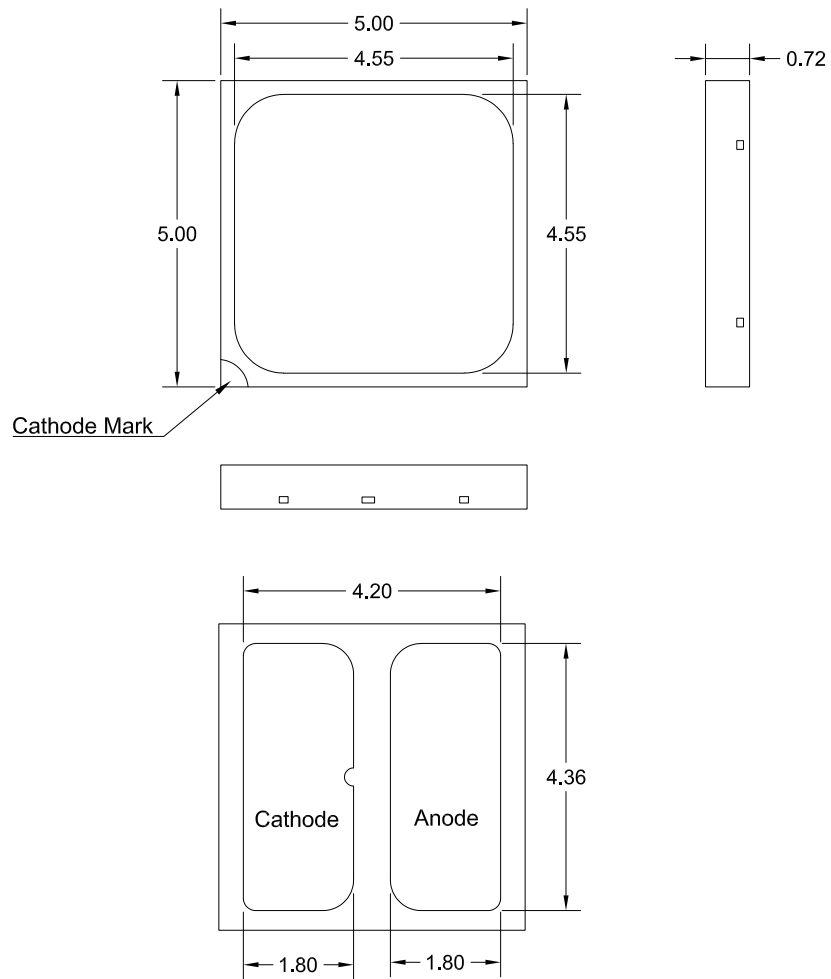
Mechanical dimensions for LUXEON 5050 HE.
